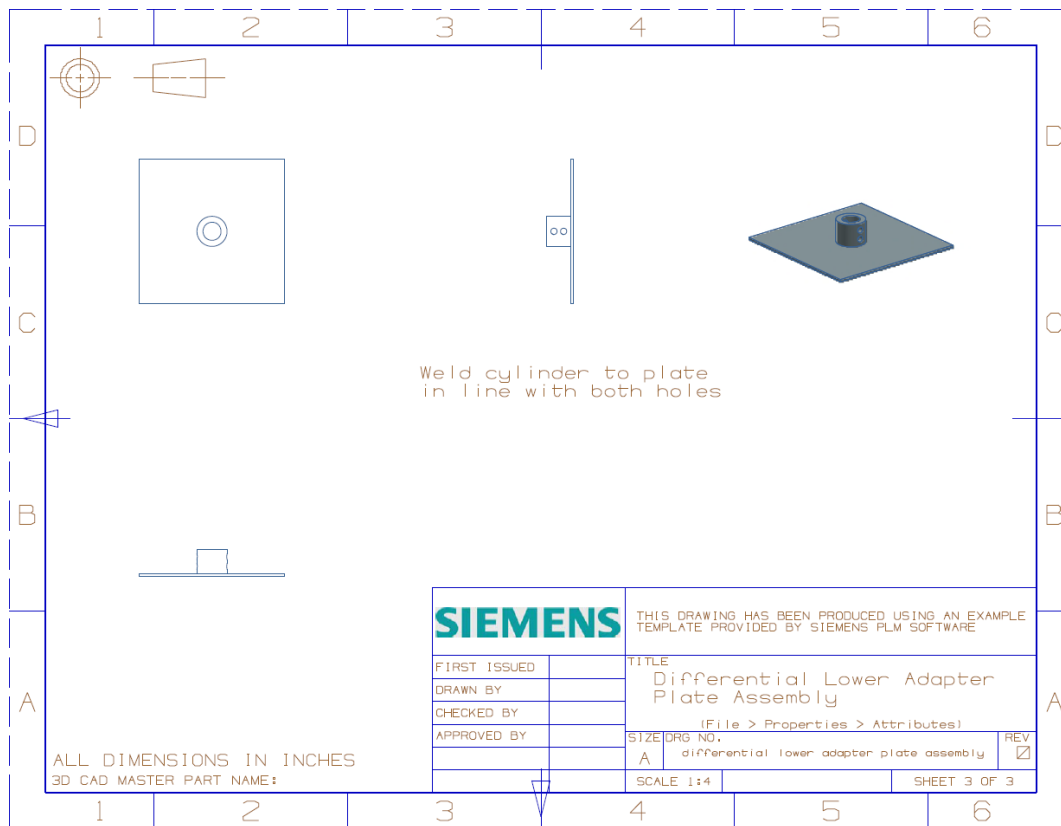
The lower adapter plate assembly for the horizontal differential drive shaft.
